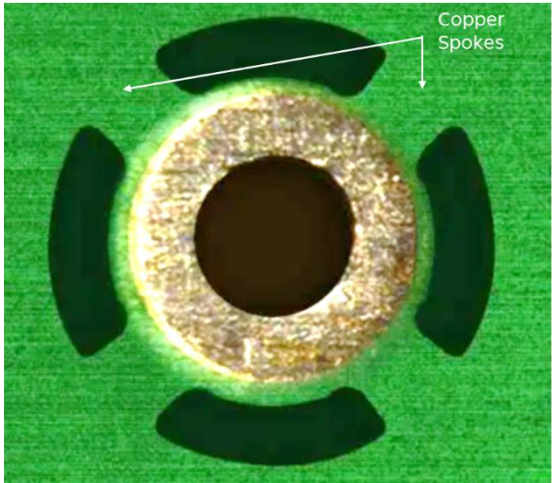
Thermal stress relief around the solder pad – referred to as “Copper spokes” in the PCB. 图 3-2 焊盘周围的热应力释放——在电路板中称为“铜辐条”。
